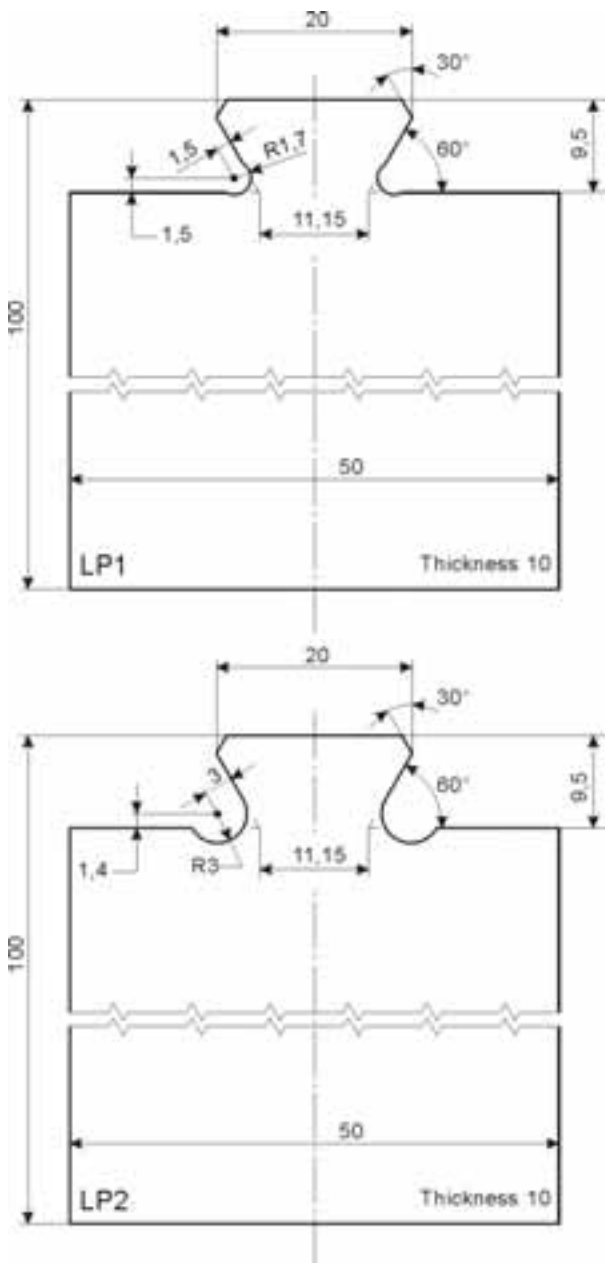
Lower parts LP1 and LP2 of joints J1 and J2
